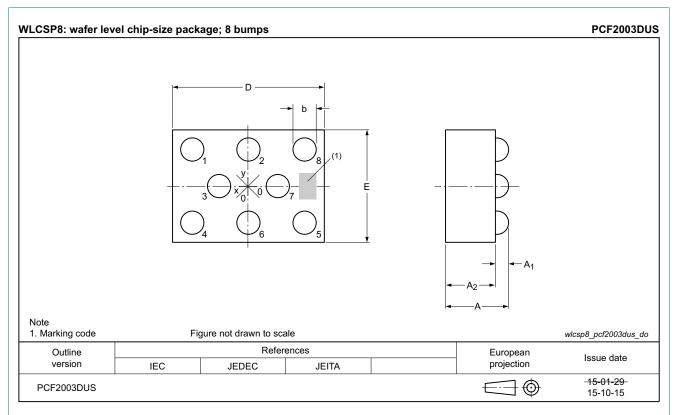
Bare die outline of PCF2003DUS (for dimensions see Table 13, for pin location see Table 14)
